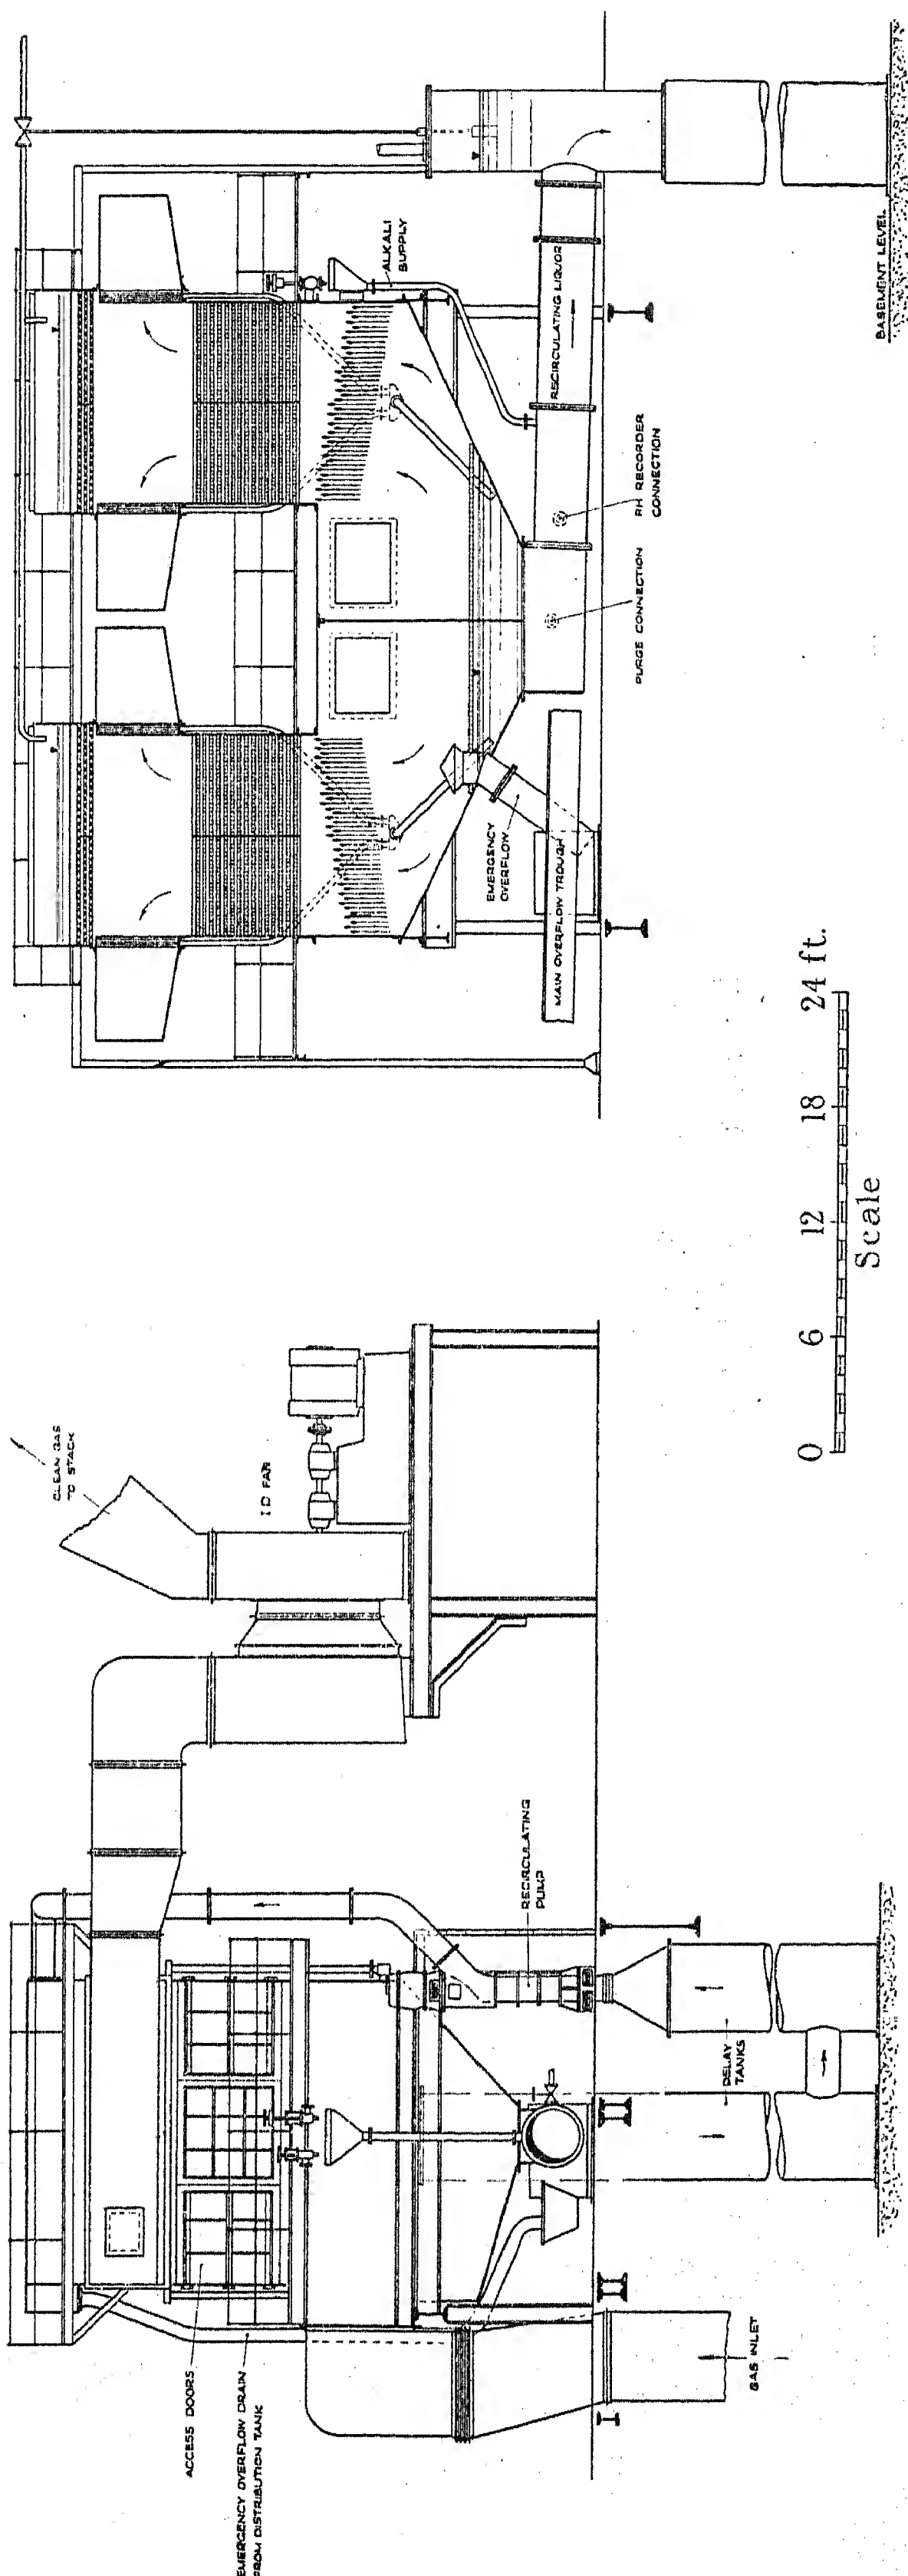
Flue-gas scrubber, with double outlet, for a boiler of 200 000 lb. per hour evaporation.
